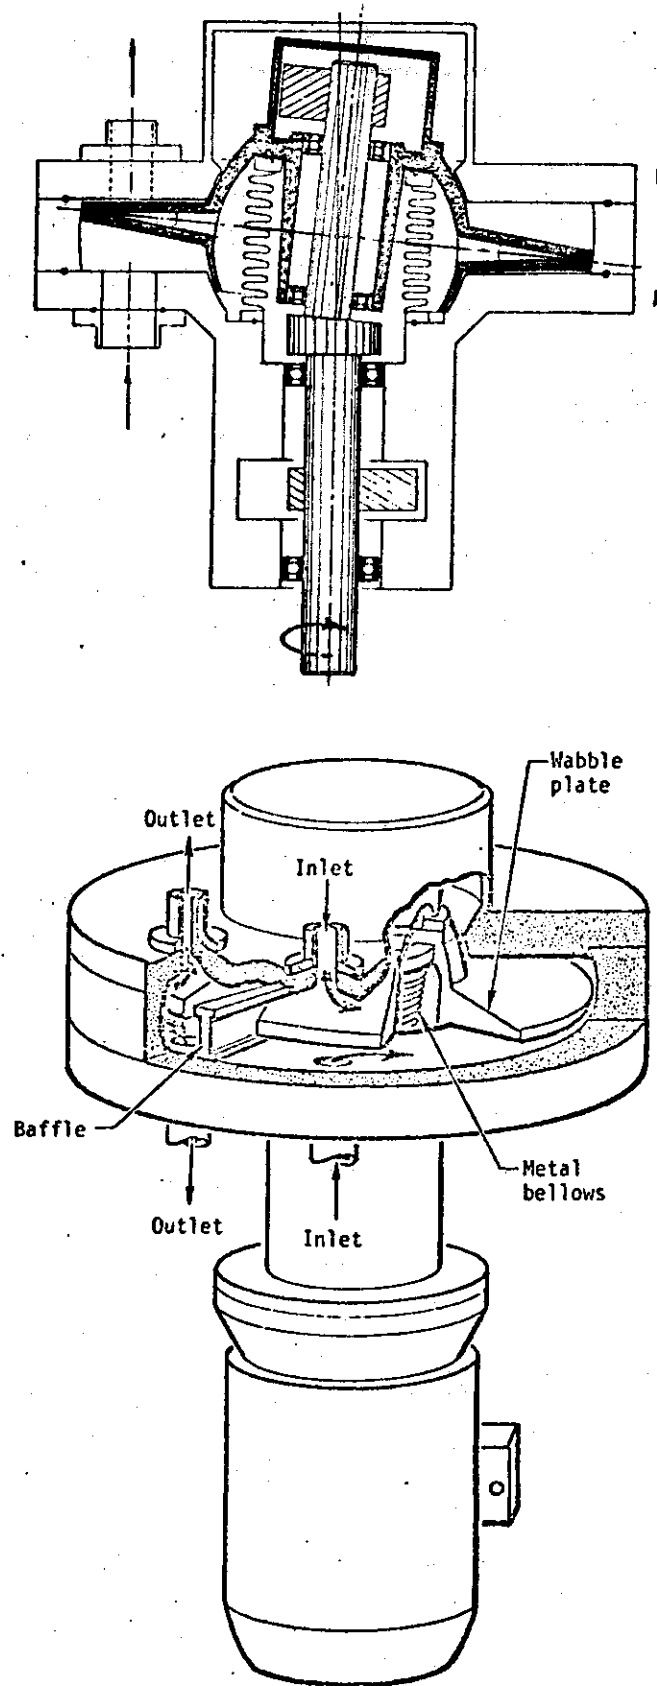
Cross section and cutaway view of wobble pump. (1)
